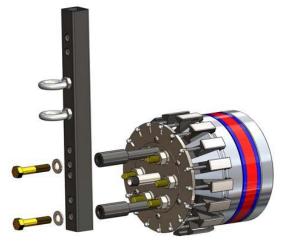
Aligning and fastening Telescoping Lifting Attachment on to Lifting Stand
